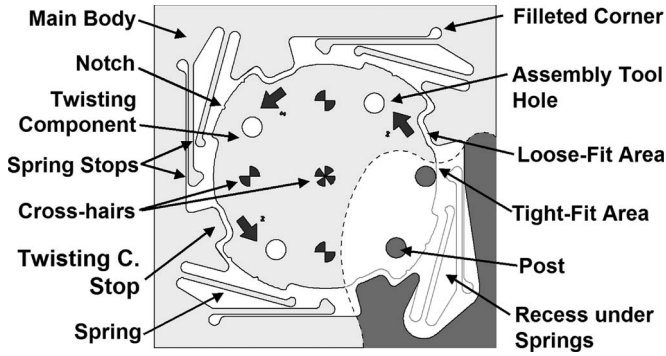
Detailed schematic of the in-plane assembly test structure.
